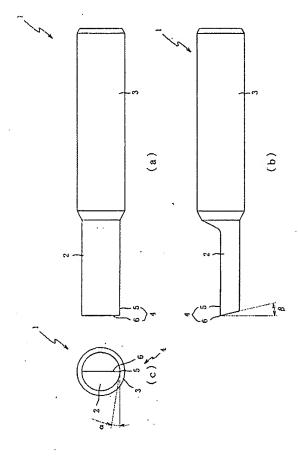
It is drawing showing the case where a nonrotation cutting tool is used about processing of a scrolling type compressor.
